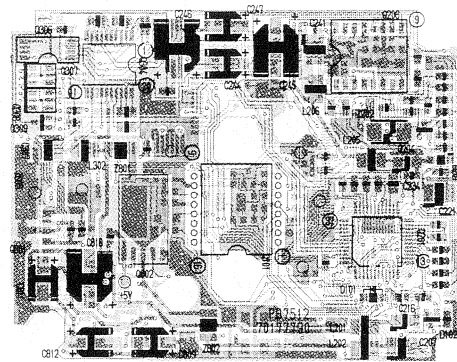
U501 Camera PC Board (Bottom Side)
